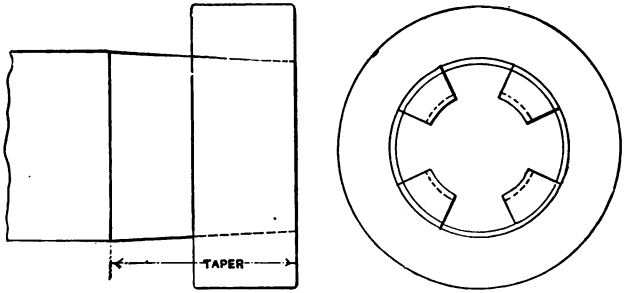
Taper Collar for Adjusting Spring Screw Dies
